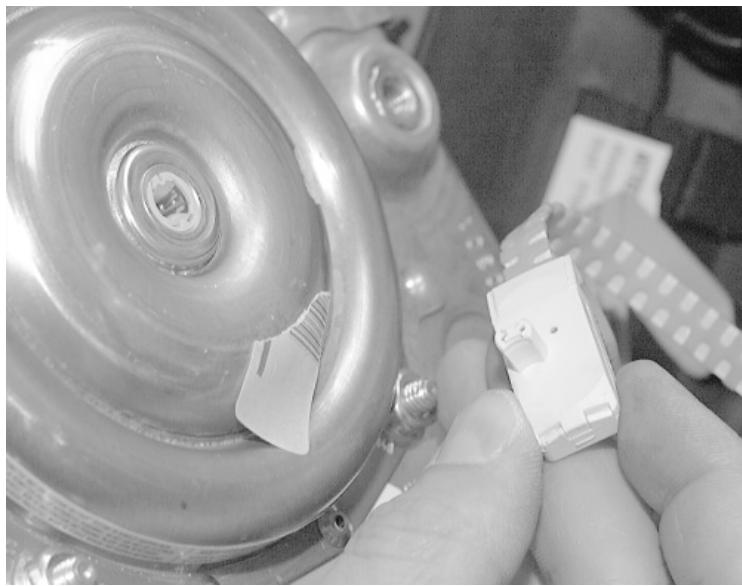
Unplug the connector from the air bag and remove the module from the car. Handle and store the module safely, as described
